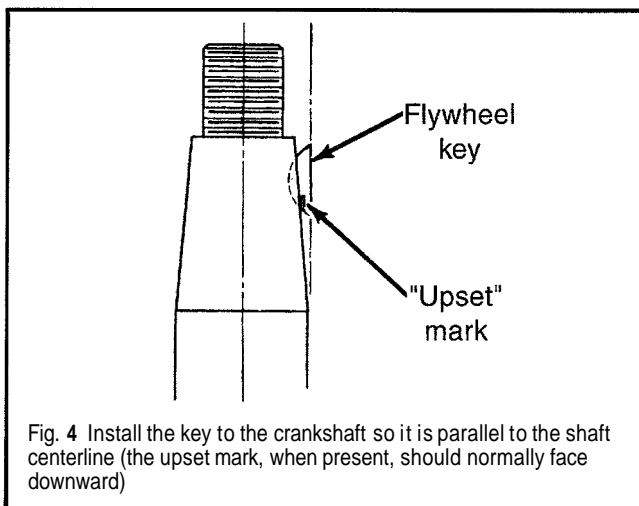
Install the key to the crankshaft so it is parallel to the shaft centerline (the upset mark, when present, should normally face downward)
